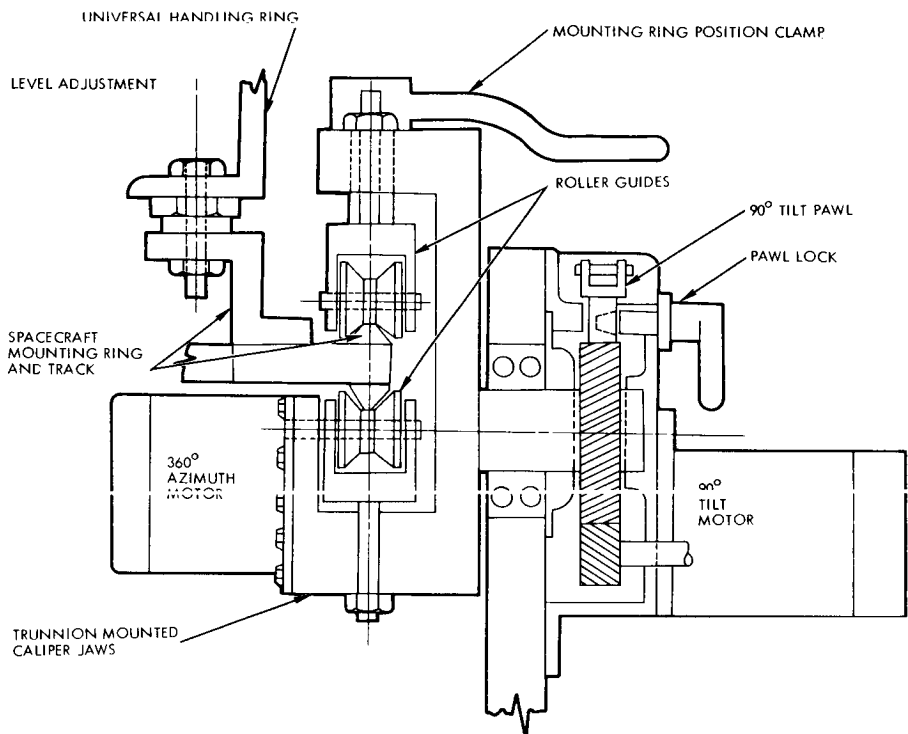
Tilt Fixture Drive, Caliper Jaws, and Mounting Ring (Cutaway View)
